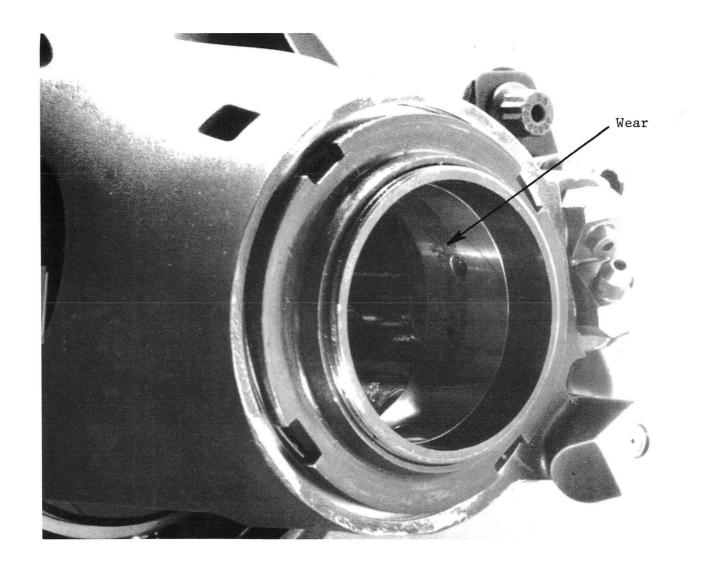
As-Received Condition of the Forward Bearing Assembly of the T700 Power Turbine Shaft
